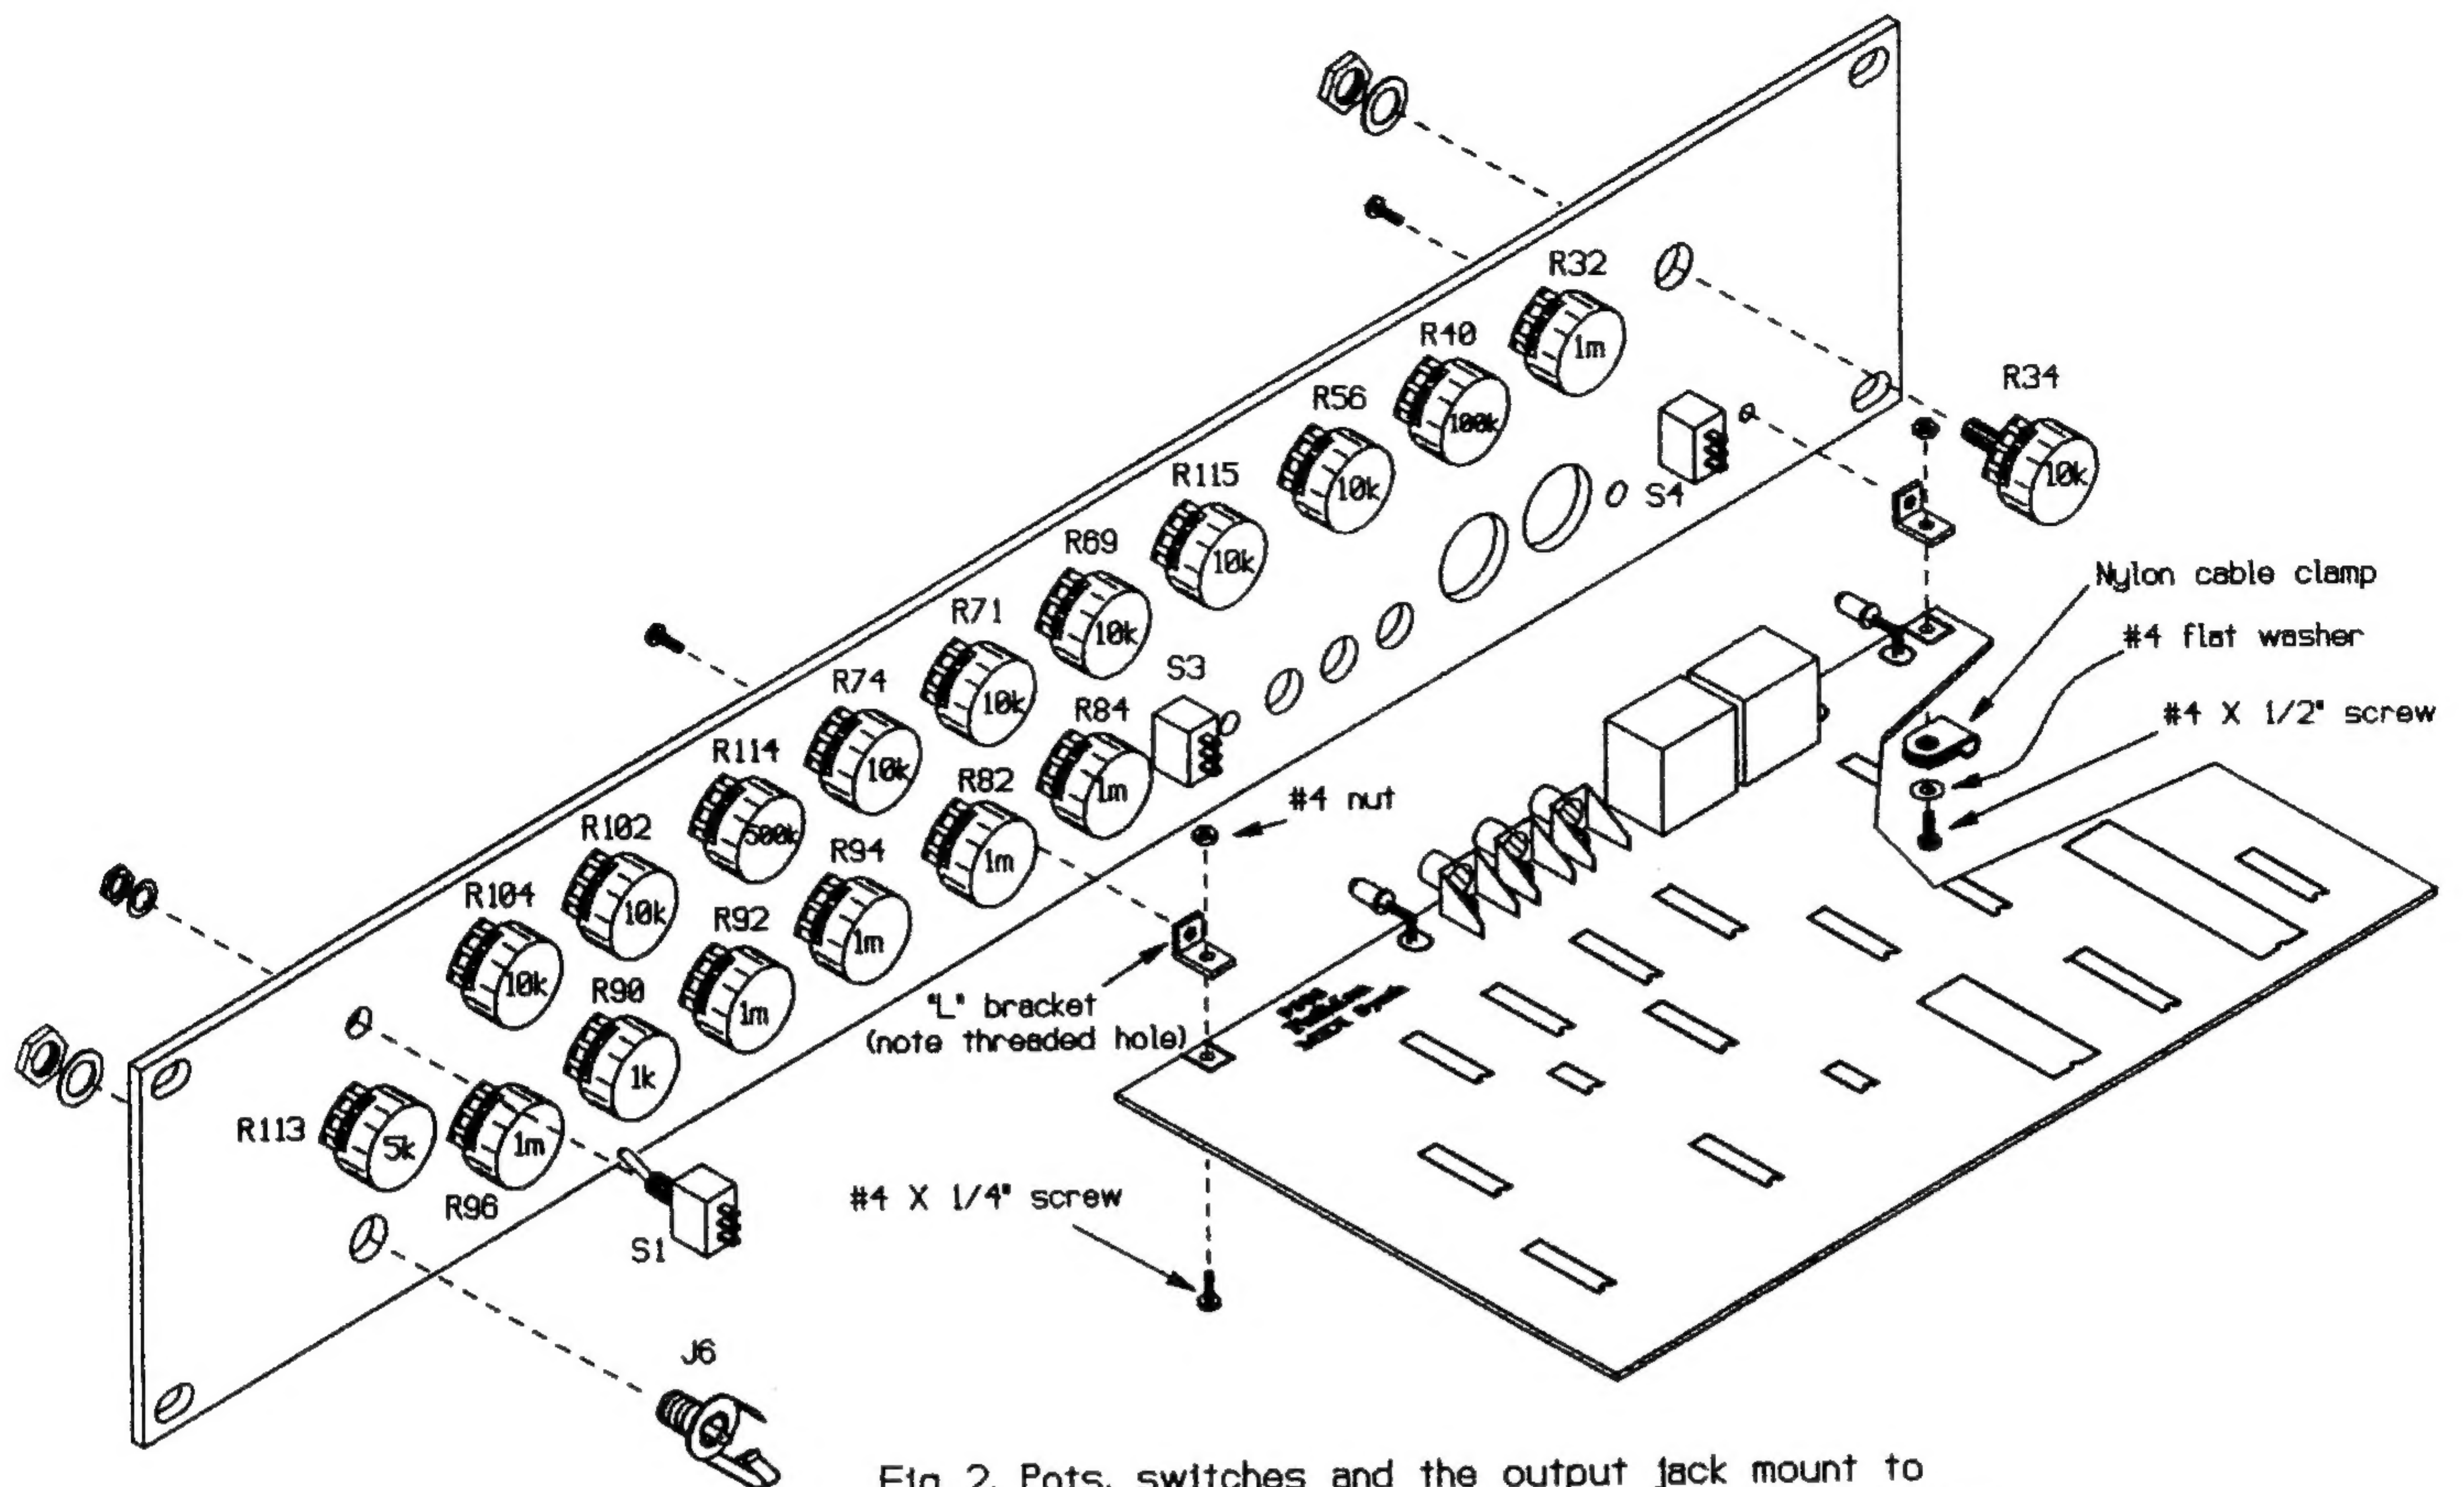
Pots, switches and the output jack mount to the front panel as shown. The circuit board attaches to the panel using "L" brackets and 4-40 hardware. Note the nylon cable clamp. The three LEDs and phono jacks protrude through holes provided for them.
